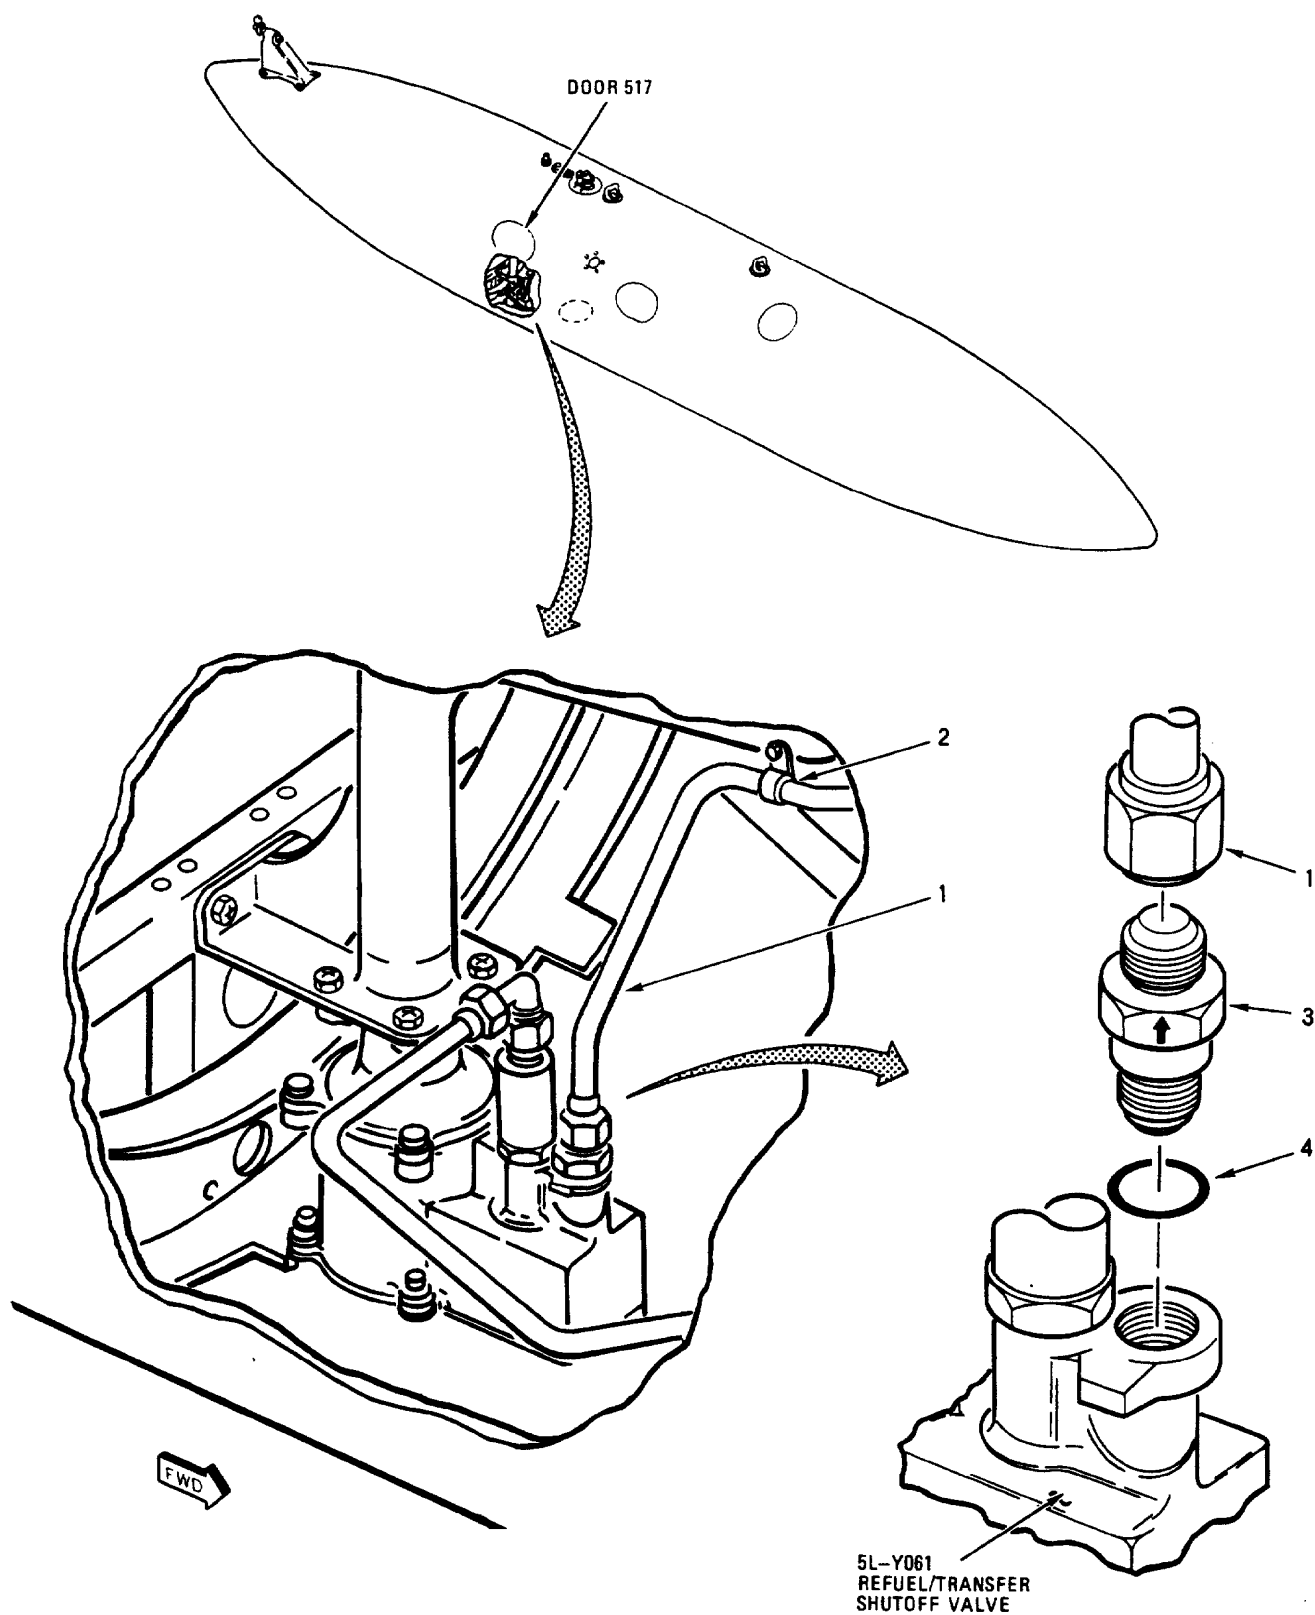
External Fuel Tank (Cylindrical) Refuel/Transfer Check Valve (5VAY688)
